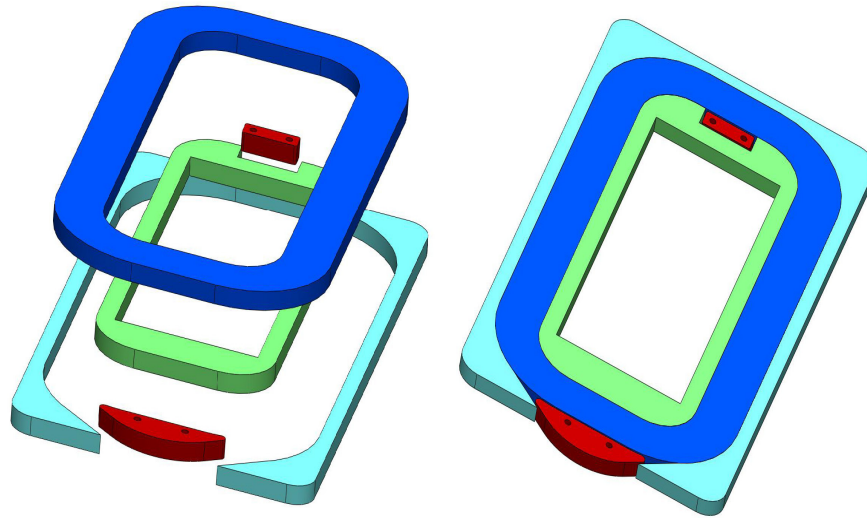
The 3D CAD illustration of the Superwind HTS coil design. - The HTS coil is shown in the exploded view at the left, making all parts identifiable. The inner and outer frames, green and light blue, respectively, are made from SS316L. The coil terminals, made from copper are colored red. The ends of the coils are positioned at both the outer and inner frame. The winding process was as follows: The inner frame was mounted on the winding machine. The insulated HTS tape was wound on to the inner frame. All access points for the measurement of the voltage and coils terminals have been soldered at appropriate place during the winding process. The outer frame was added to the wound coil, measurement wires are lead to the circuit board mounted on the outer frame (not shown in the figure) and coil is vacuum impregnated with the epoxy(5).
